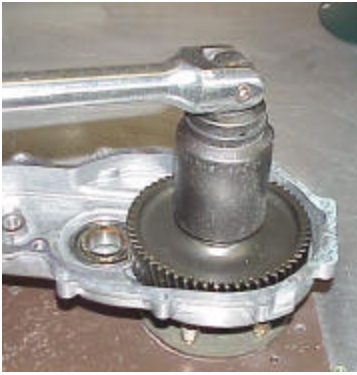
Using a 3/4" drive breaker bar and 1-5/8" socket remove the large nut which is Left Hand Rotation!!
